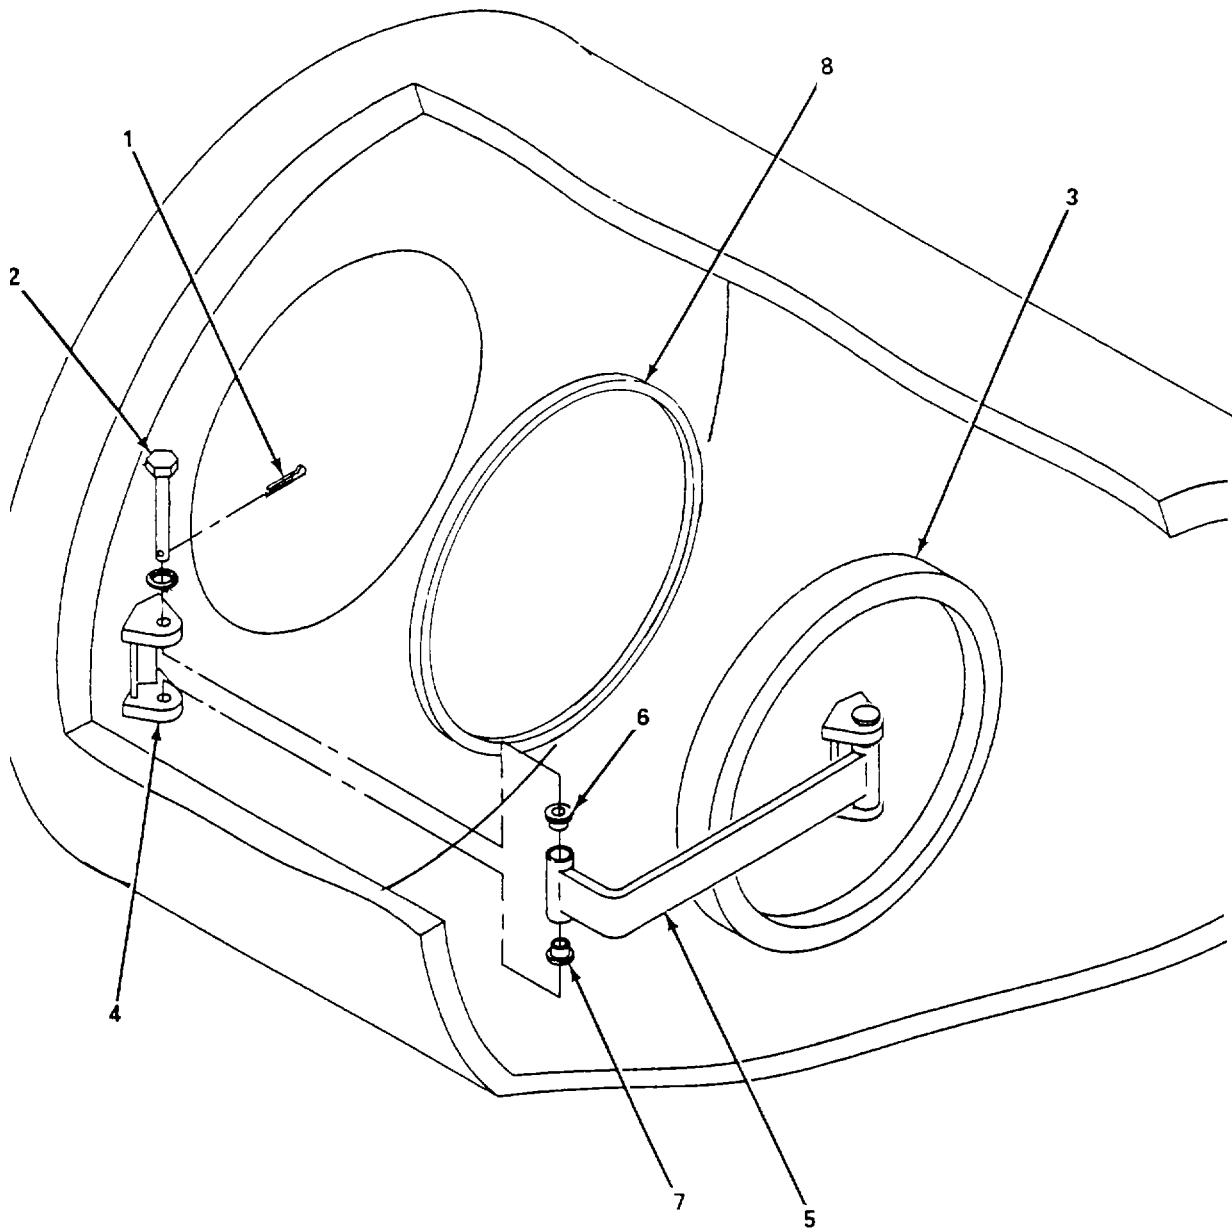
Inner/Outer Lock Door Assembly, Replace.
